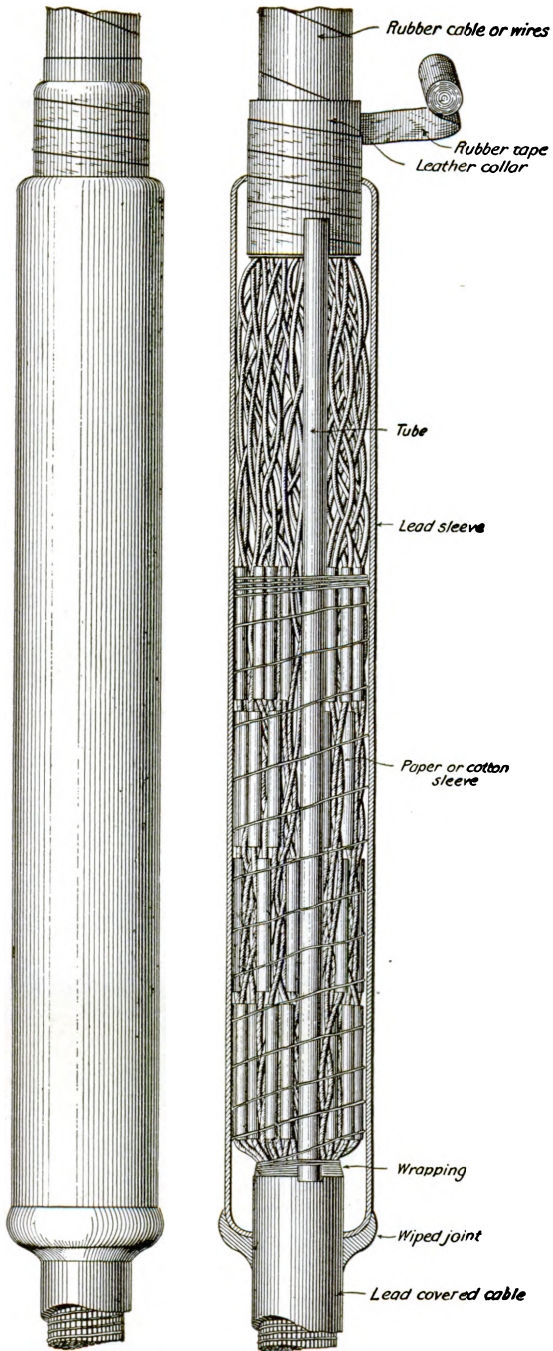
CABLE, PAPER INSULATION, CONSTRUCTION OF POT HEAD.
